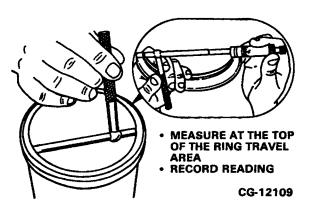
Check Cylinder Sleeve I.D. @ Top of Ring Travel
